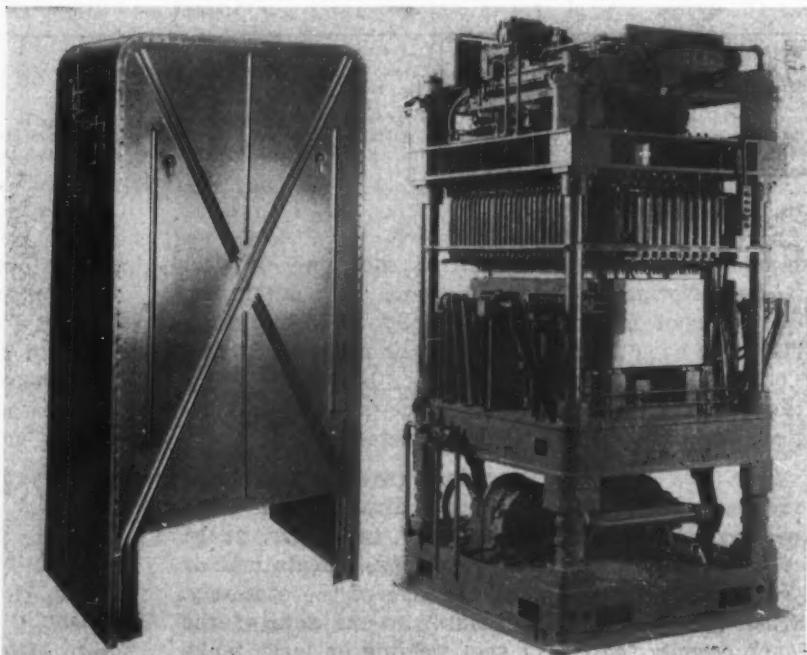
Pneumatic ultra speed multiple-gun welder for welding back panels to outer shells of refrigerator cabinets, left, at the rate of 100 cabinets per hour, with 120 spots per cabinet. The machine contains three transformers with double series weld circuits making four welds per transformer. The guns are sequenced by means of a geneva-motion operated sequencing valve. The work is loaded in a convenient position, then the lower platen of the machine elevates to welding position
